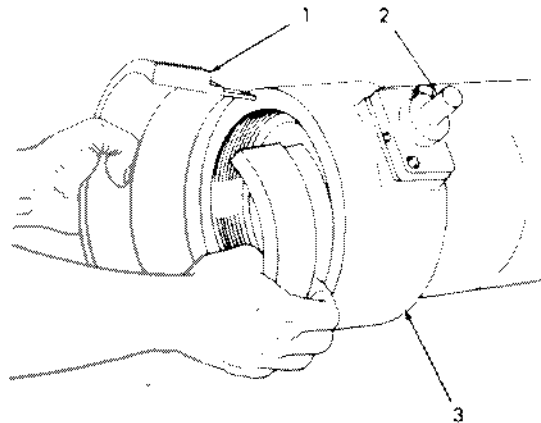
INSTALLING CYLINDER PACKING GUIDE T-75737
